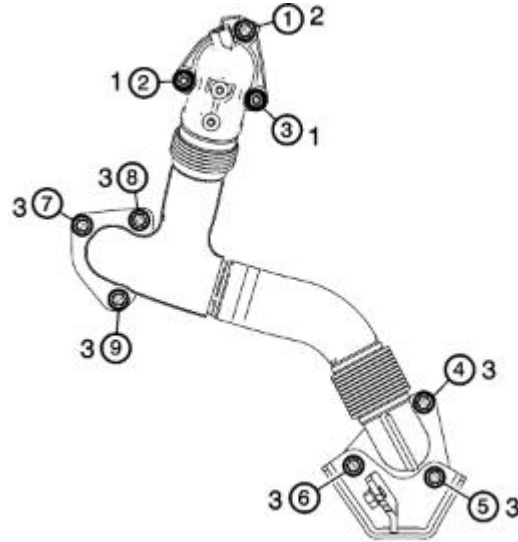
Passenger side exhaust up-pipe tightening sequence
